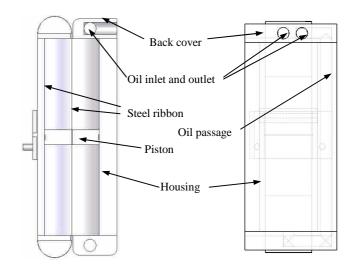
Z Axis Actuator – Side view and Back View with Oil Flow Illustration
